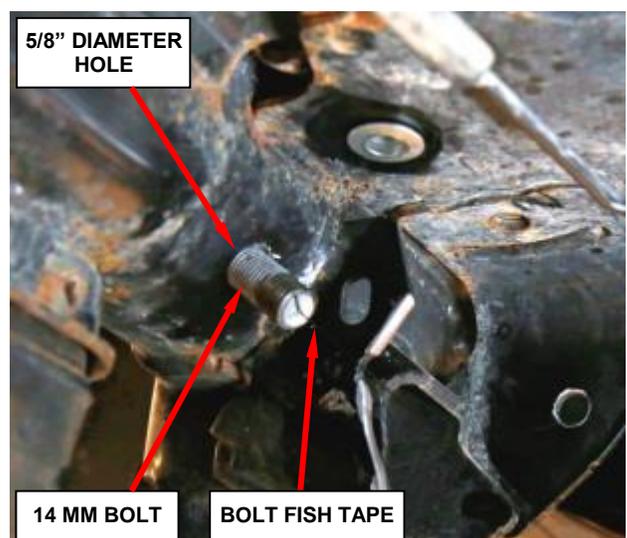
14 MM Bolt in 5/8” Diameter Hole Location
